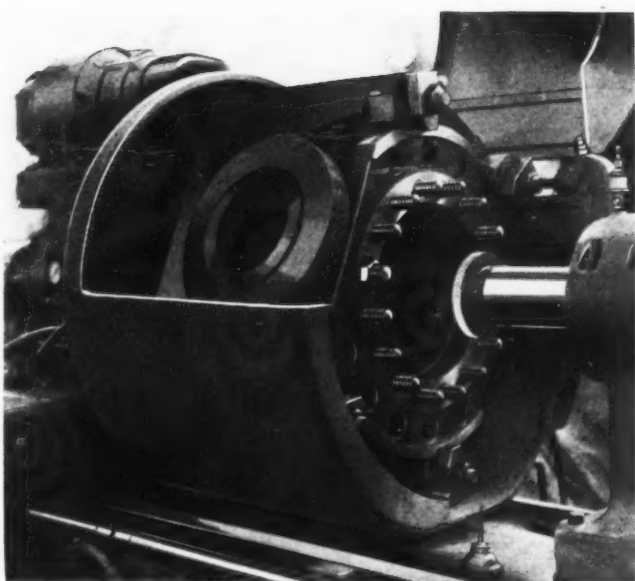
Large Valve Bodies are Bolted to an Adapter Plate for the Taper Grinding Operation, and this Plate is Accurately Located on and Clamped to Work Fixture
